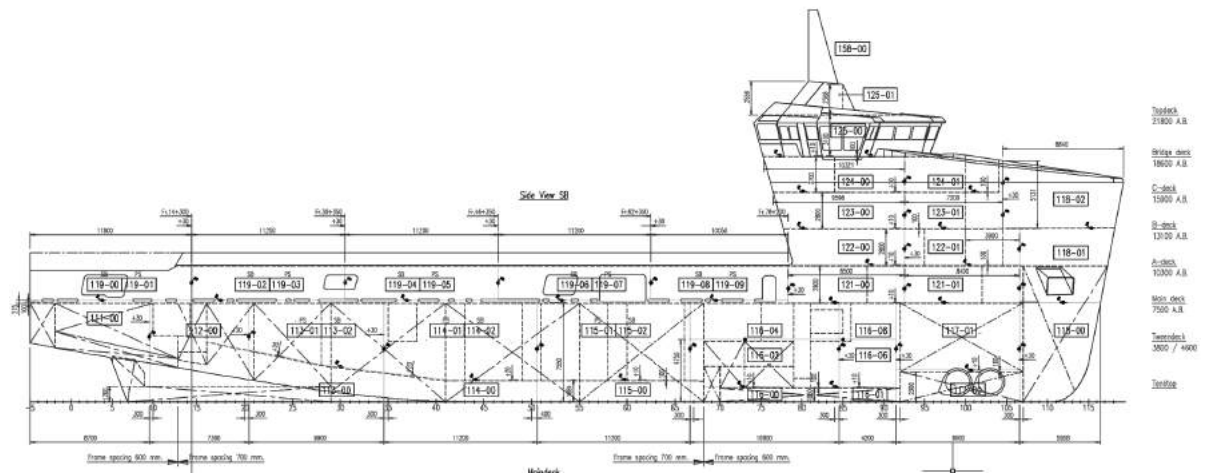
Section plan of a Damen PSV 3300 (Damen, n.d.c)
